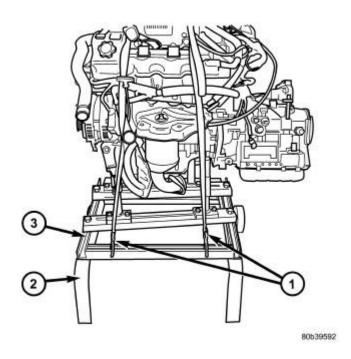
ENGINE REMOVAL CRADLE Courtesy of CHRYSLER LLC
